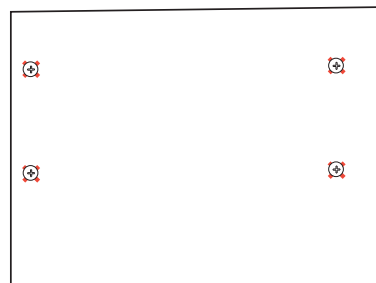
Drill pilot holes and insert screws, but do not tighten
